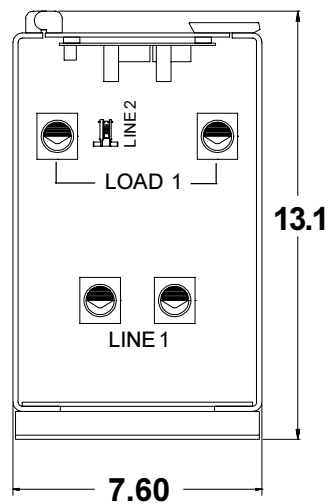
End view of 500 - 1000 Amp controller showing electrical connections.
